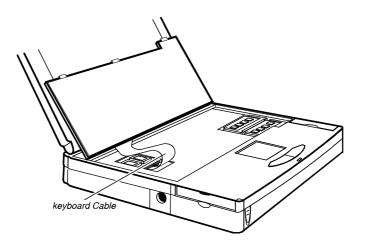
, UNPLUGGING THE KEYBOARD CABLE
